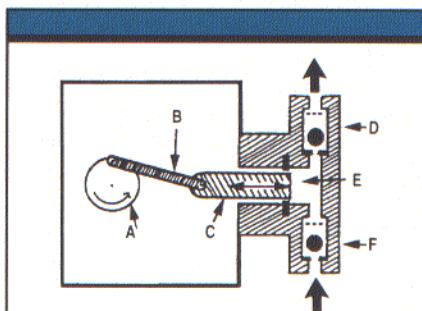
The reciprocating-piston pump. Legend: A = cam, B = connecting rod, C = piston, D = outlet check valve, E = cylinder, F = inlet check valve. (Reprinted with permission from reference 1.)
